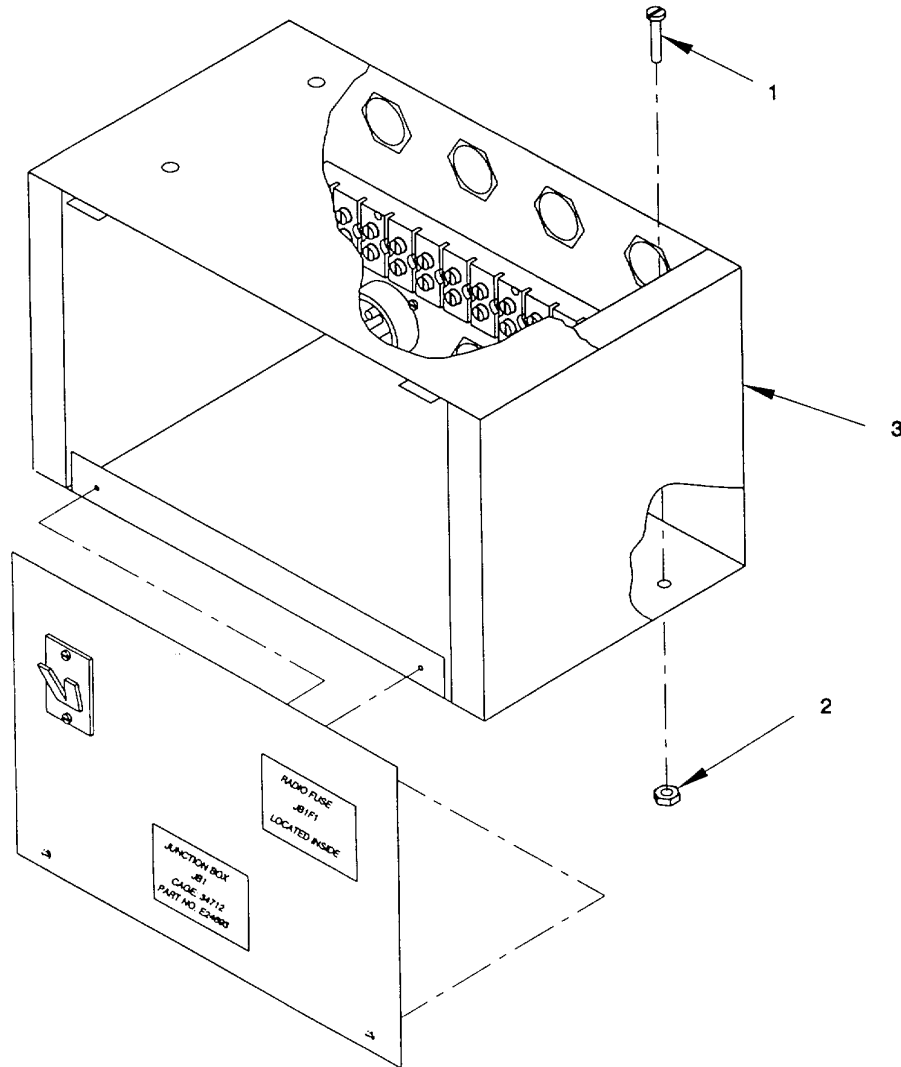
Junction Box Assembly "JB1", Remove/Install.
